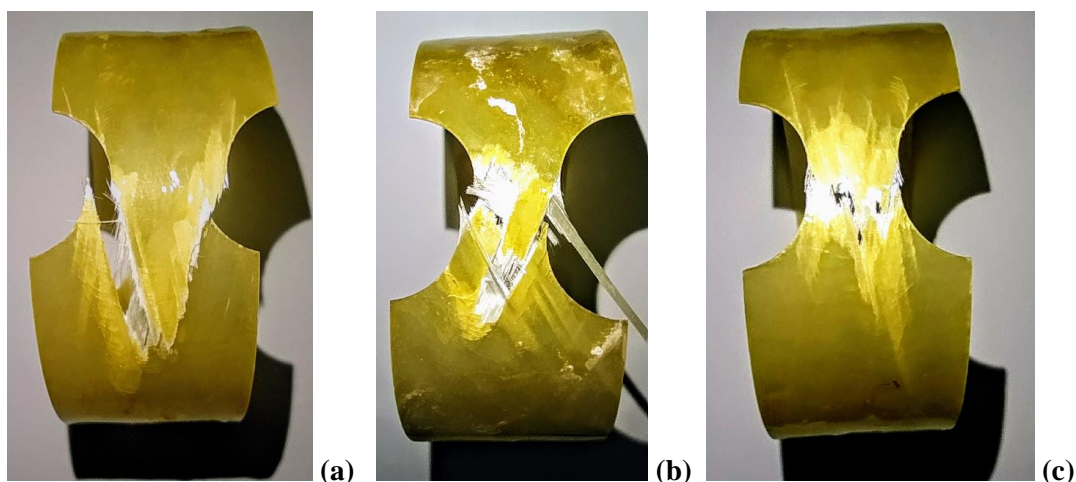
Fracture of the test specimens: (a) A50F100. (b) A65F100. (c) A80F100.
